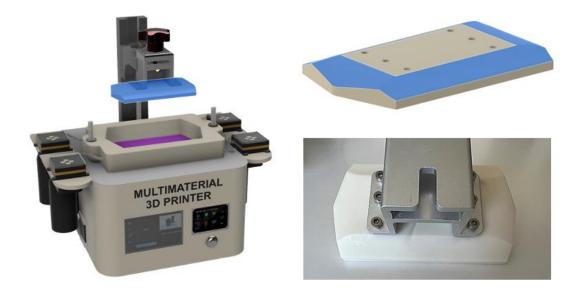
Print platform design with chamfered perimeter design for easy resin cleaning when changing materials.
